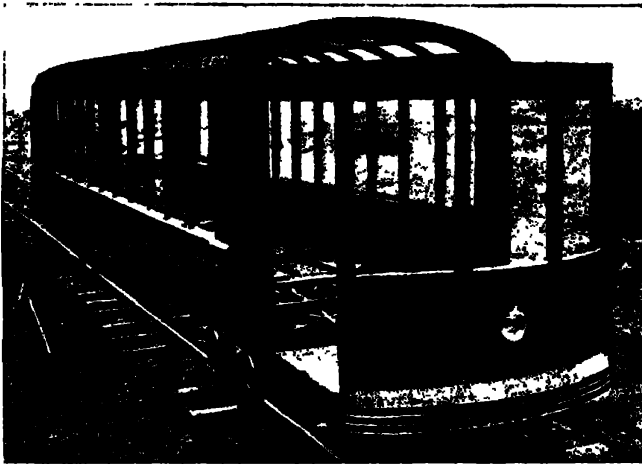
Framing Complete, Ready for Roof Sheathing and Wood Floor
